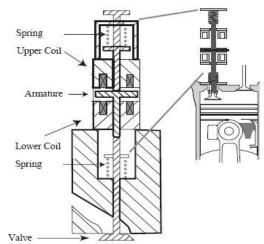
Cross sectional view of the electromagnetic valve actuator [6].
